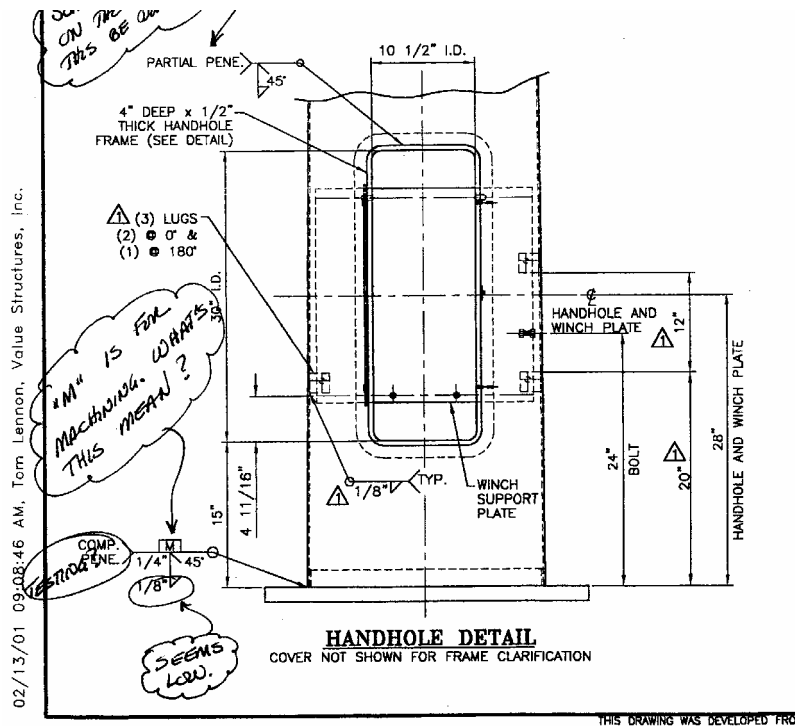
Hand-Hole Detail Illustrating Full Penetration Groove Weld at Mast Base.
